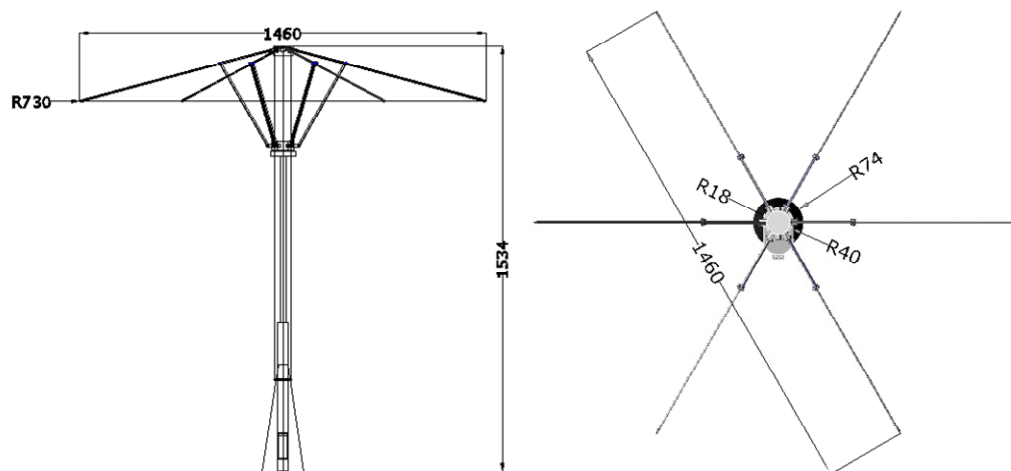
The 2D and 3D dimensional views of the Umbrella unit.
